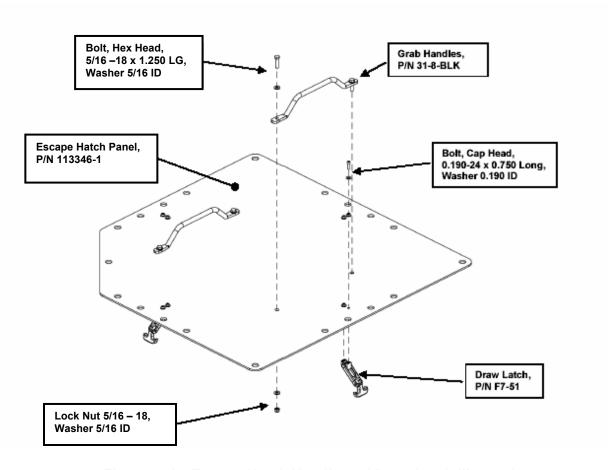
A. Escape Hatch Handle and Draw Latch illustration.
